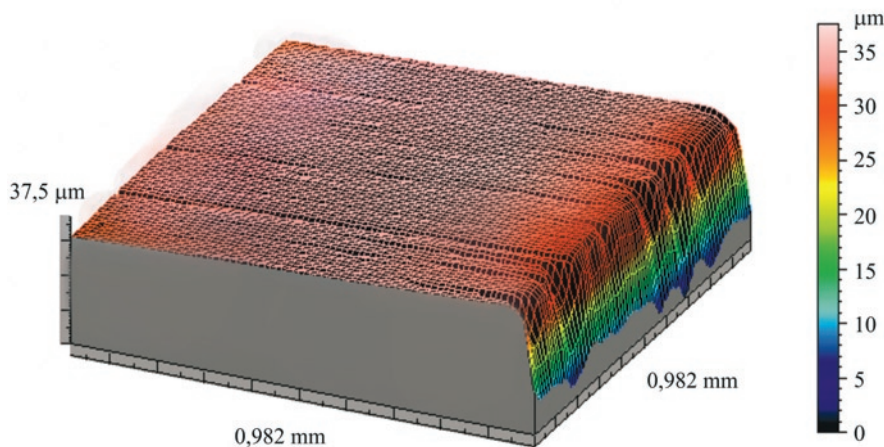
Cutting edge and punch flank surface after 800 000 cuts with blanking clearance 8% (M2+TiN punch material)
